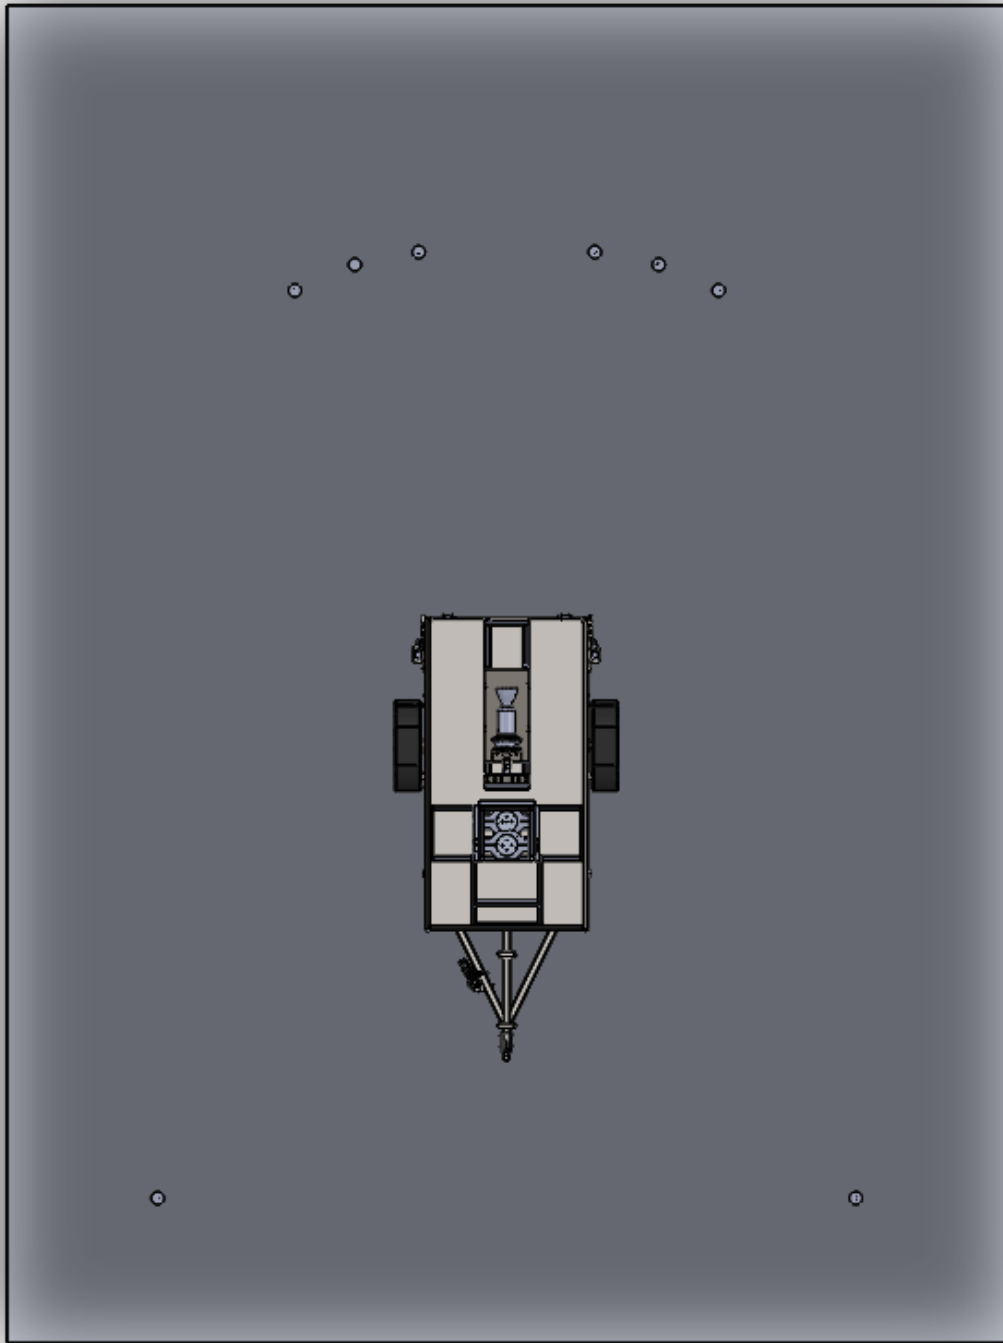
Test stand structure with ground anchor positioning TOP VIEW
